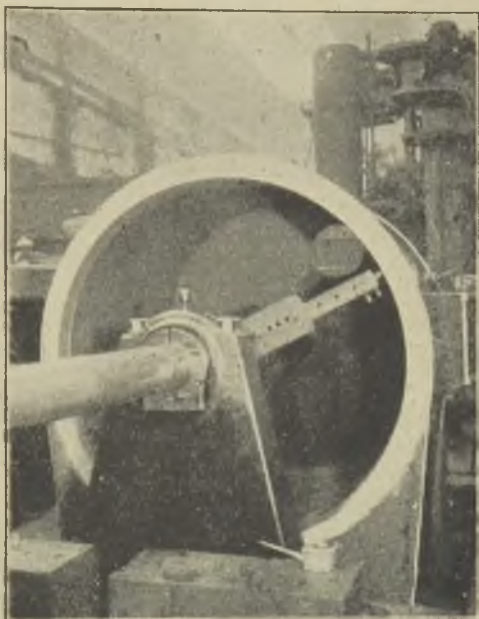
MARINE ENGINE CYLINDER IN THE BORING MACHINE.
